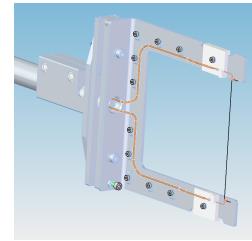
Mechanical view of the frame head of the FETS-FFA WSM. The wire (black line in the centre) is electrically isolated from the aluminium frame by the PEEK insulator (white plates). The signal cables are connected to the spring wires, allowing for the resistance of the wire to be measured from outside the vacuum vessel.
